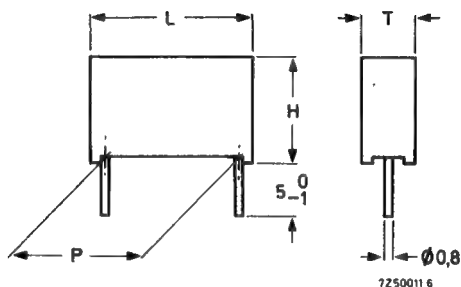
For dimensions T, L, H and P, see Tables 1 to 4.
